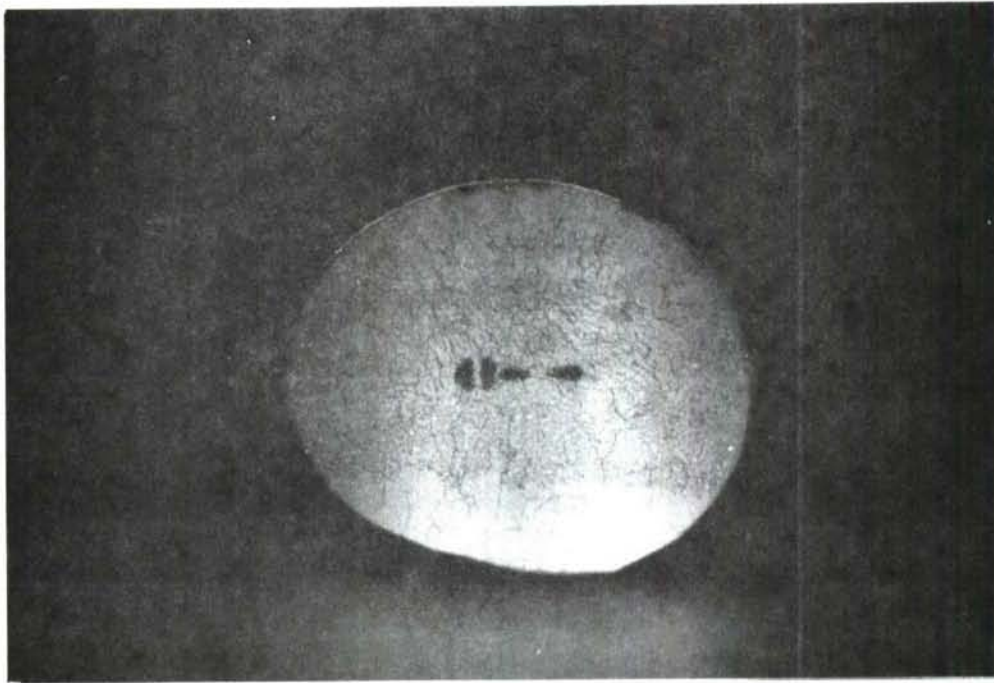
An image of a 0.50 inch long fatigue crack emanating from a 0.19 inch diameter hole in a 0.045 inch thick aluminum fatigue test specimen.
